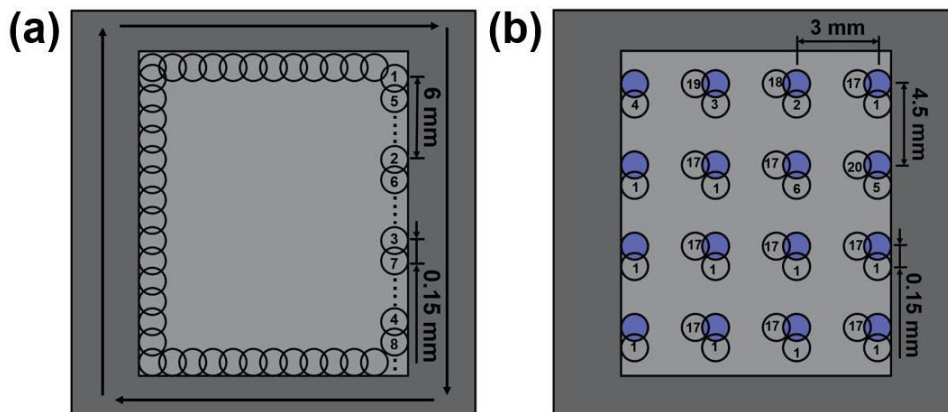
Pattern scanning path of (a) contour welding, (b) center welding.
